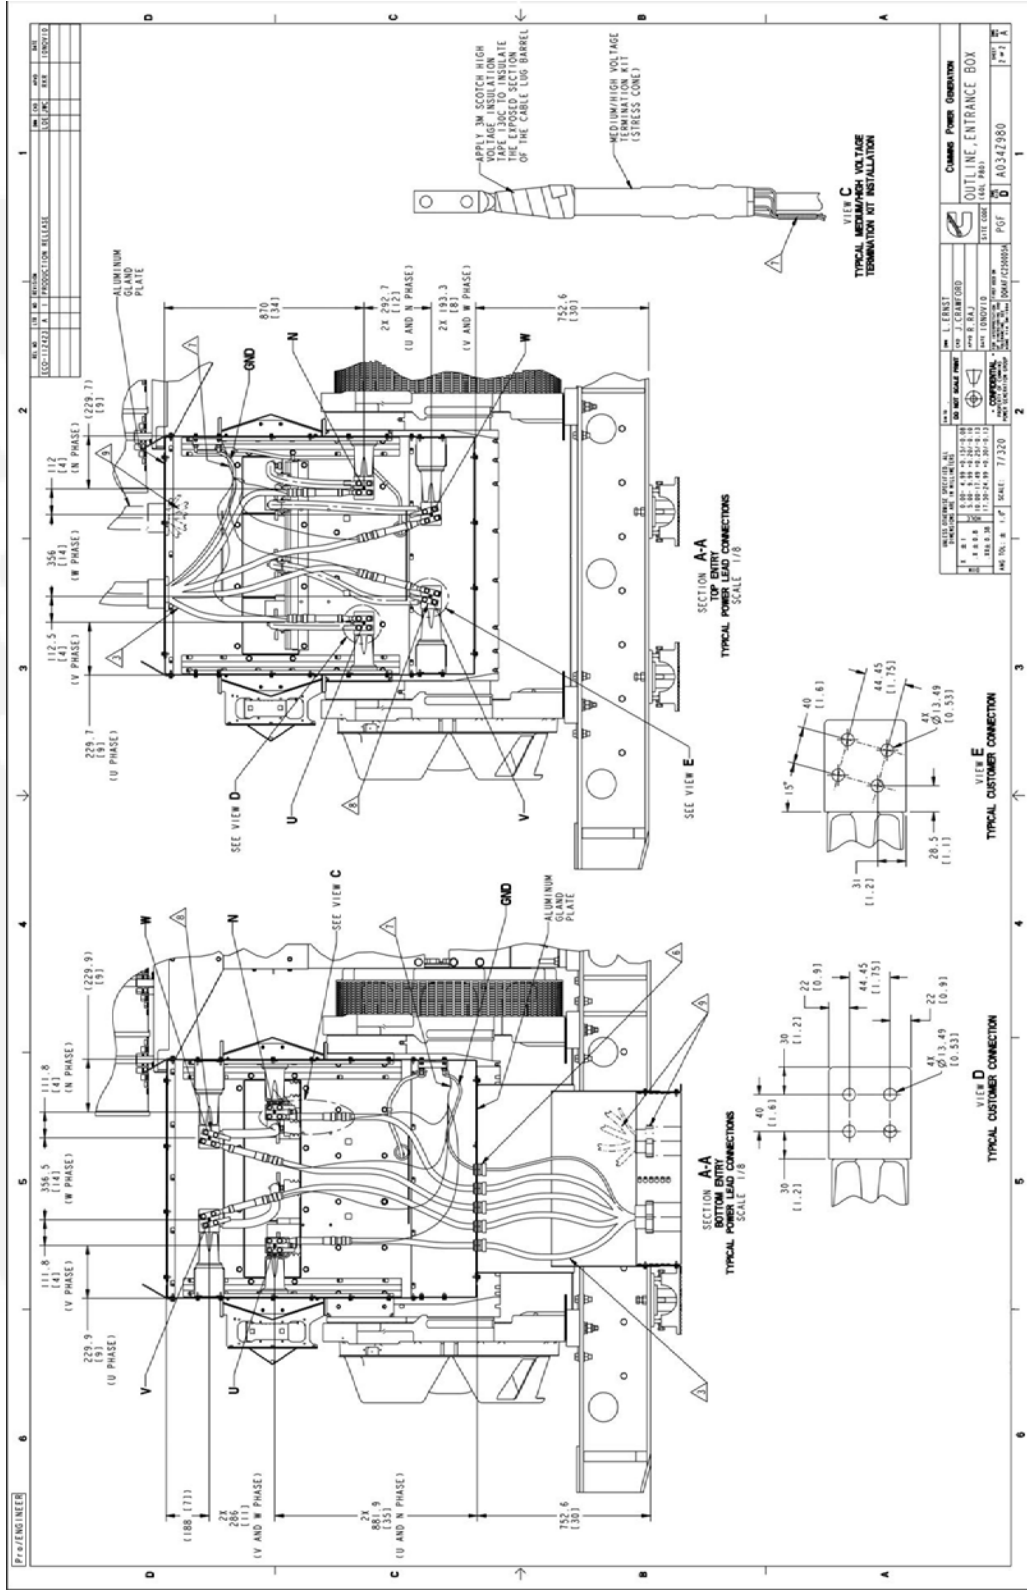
P80 ALTERNATOR ENTRANCE BOX OUTLINE DRAWING (SHEET 2 OF 2)
